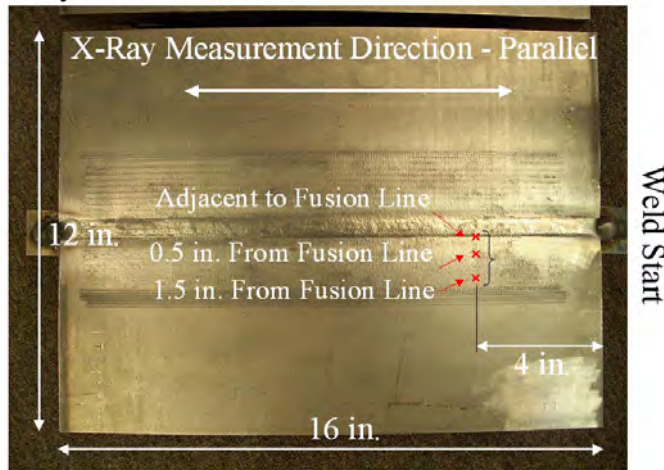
Representative Alloy 22 welded specimen with post welding surface enhancement.
